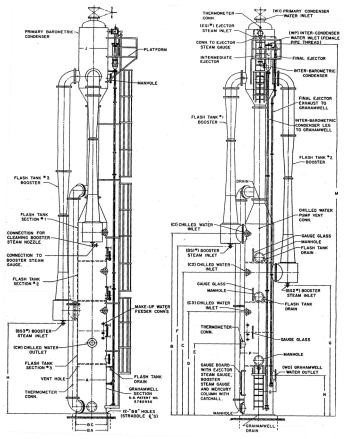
Packaged steam-jet refrigeration system, three boosters. (Courtesy Graham Manufacturing Co., Inc.)
